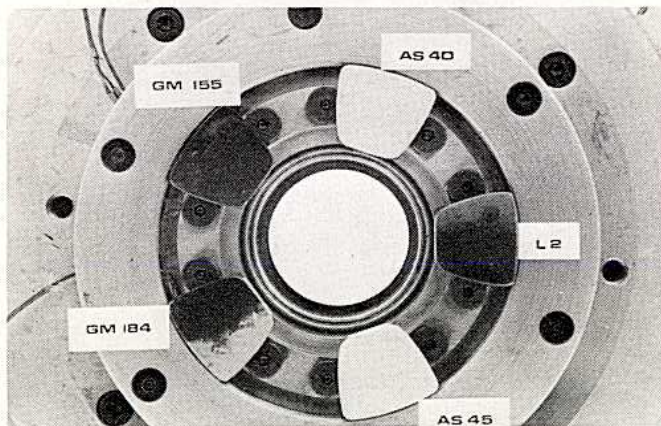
Thrust pads with various surface materials exhibiting differing attack by an e.p. oil
